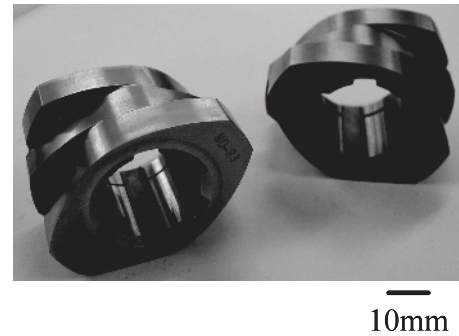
Kneading disks made of Mo₂NiB₂ boride base hard alloy for resin extrusion molding machine.
